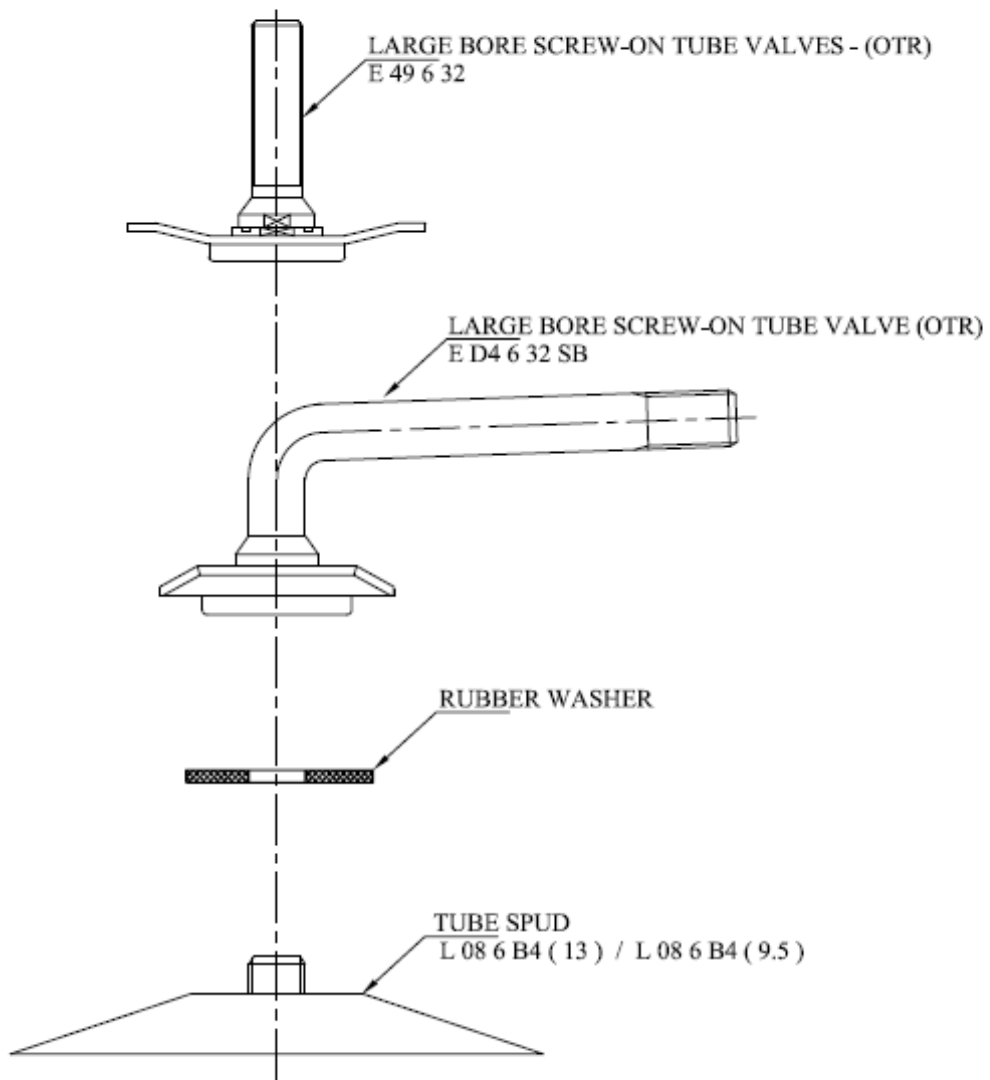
LARGE BORE SCREW-ON TUBE VALVES - (OTR) E 49 6 32
